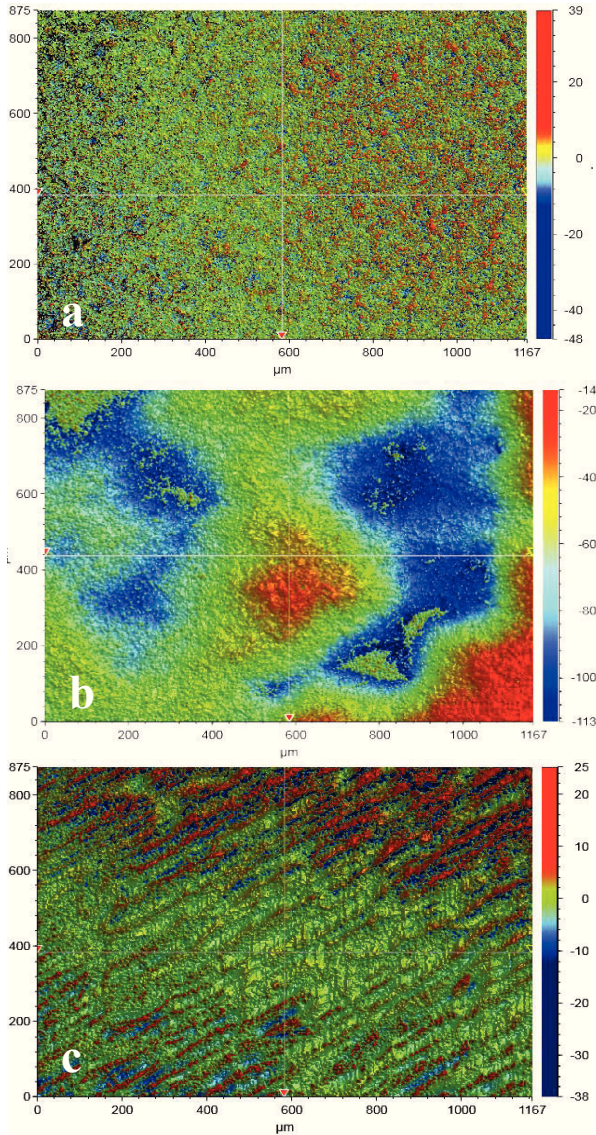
Surface images, a) investment casting impeller; b) Surface SLM impeller, and c) machined impeller.
